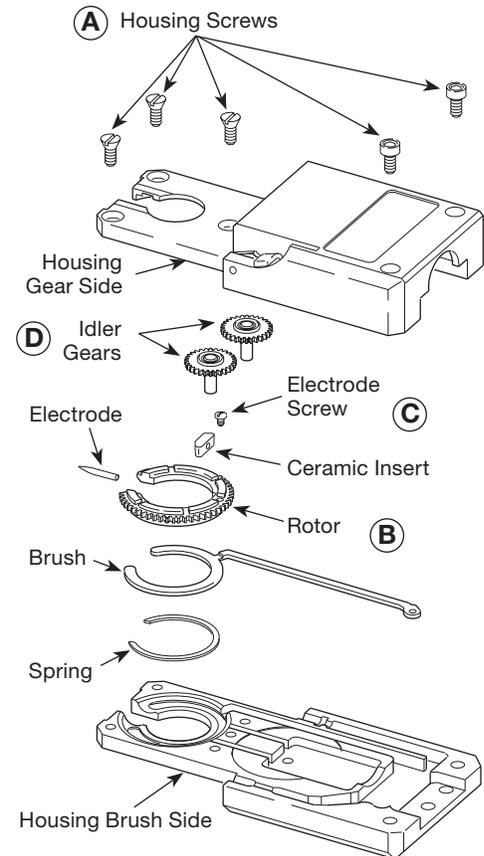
Removing Series 4 Micro Weld Head Components for Cleaning
